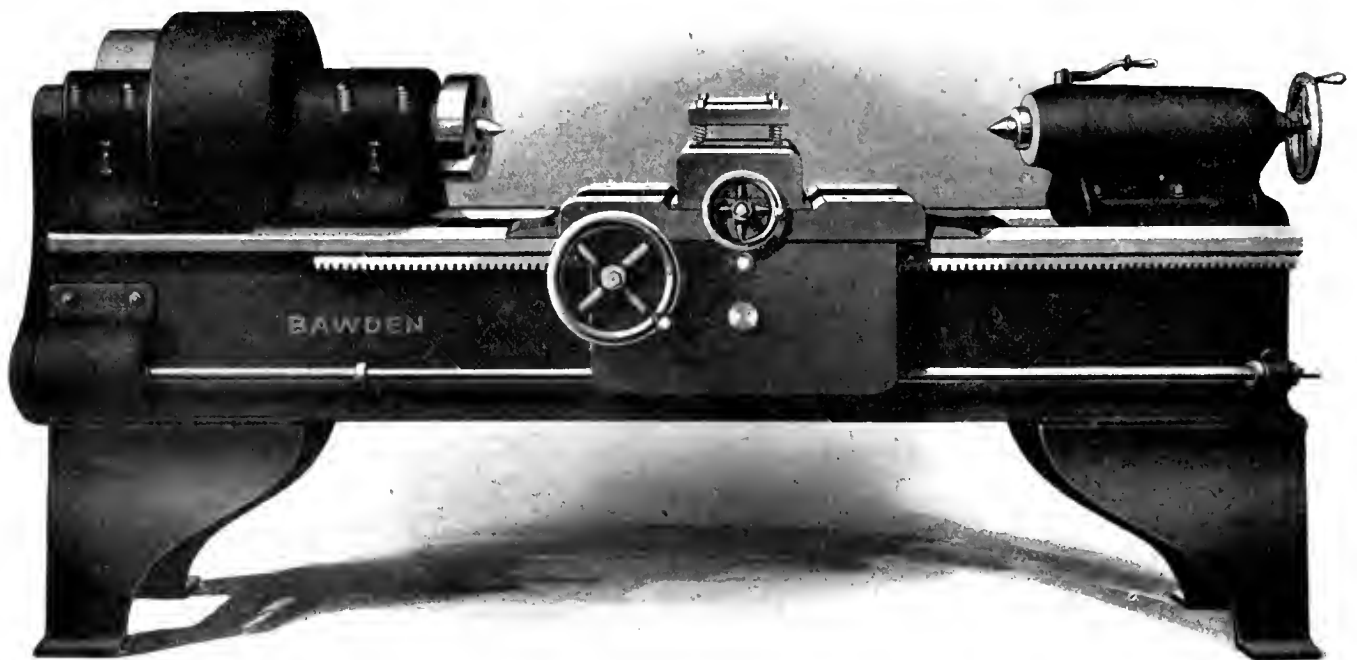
24-IN. HEAVY DUTY MANUFACTURING LATHE REDUCED TO 16-IN. SWING, FOR SHELLS UP TO 6 IN. DIA.
